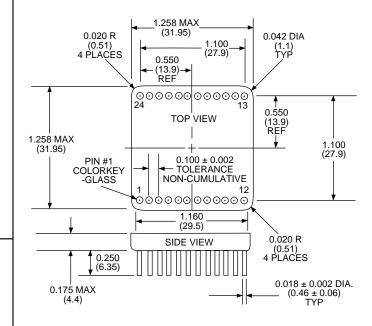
BUS-63102 AND BUS-63104 MECHANICAL OUTLINE 24-PIN SQUARE PACKAGE
